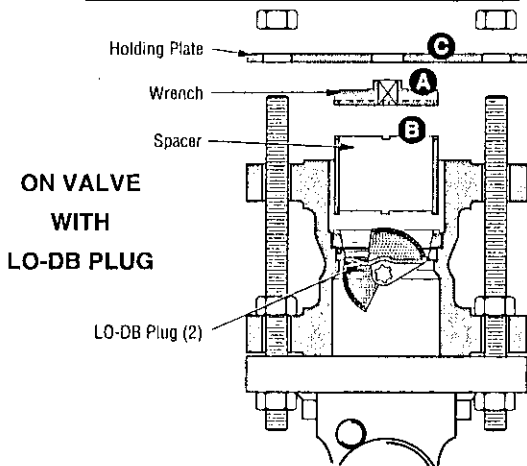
Seat Ring Retainer Removal and Seat Ring Alignment Devices
